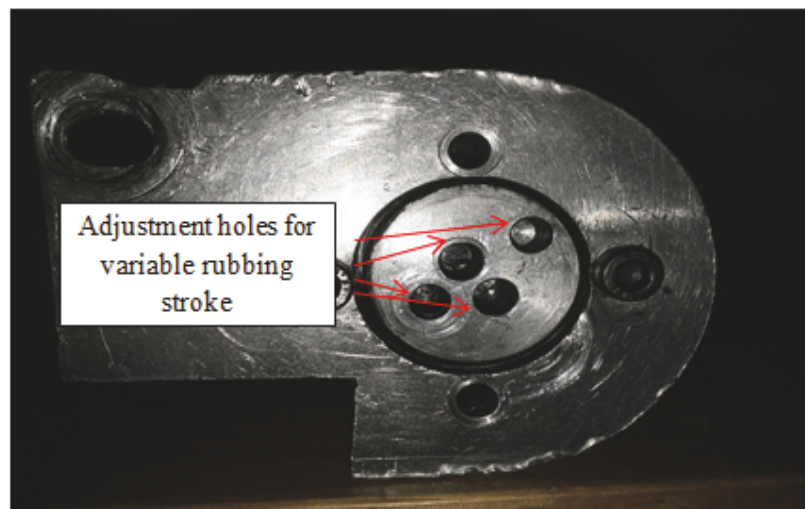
Crank shaft with different holes for adjustable stroke length
